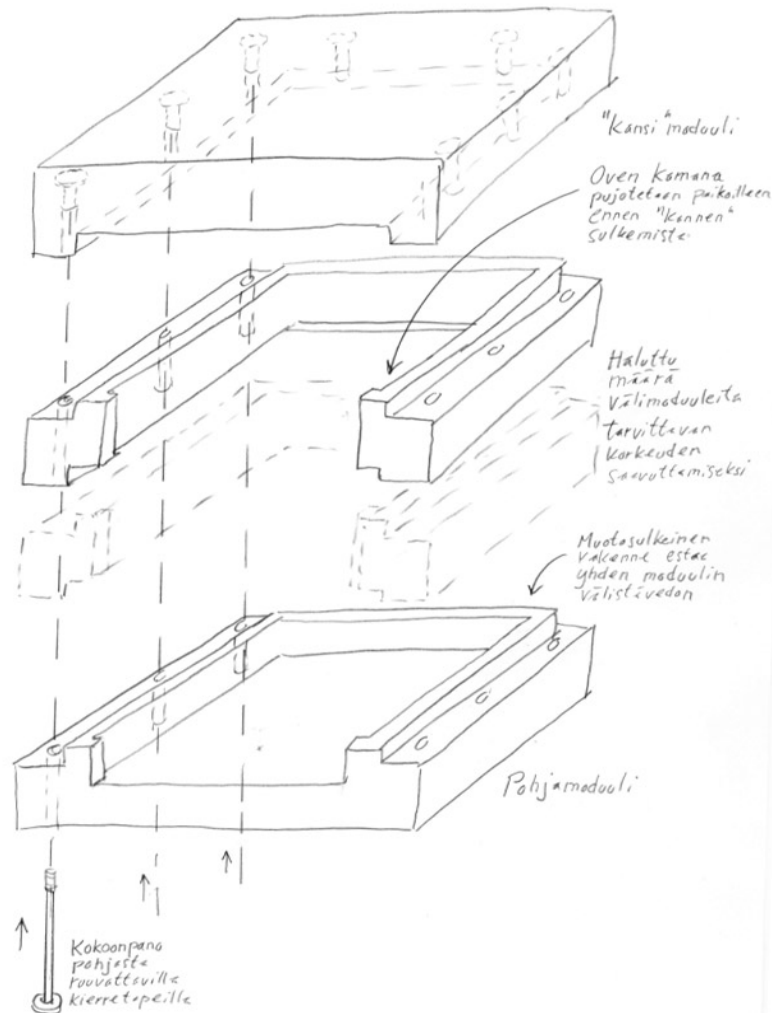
An improvement suggestion for changing the casting into an assembly [The author's drawing]
